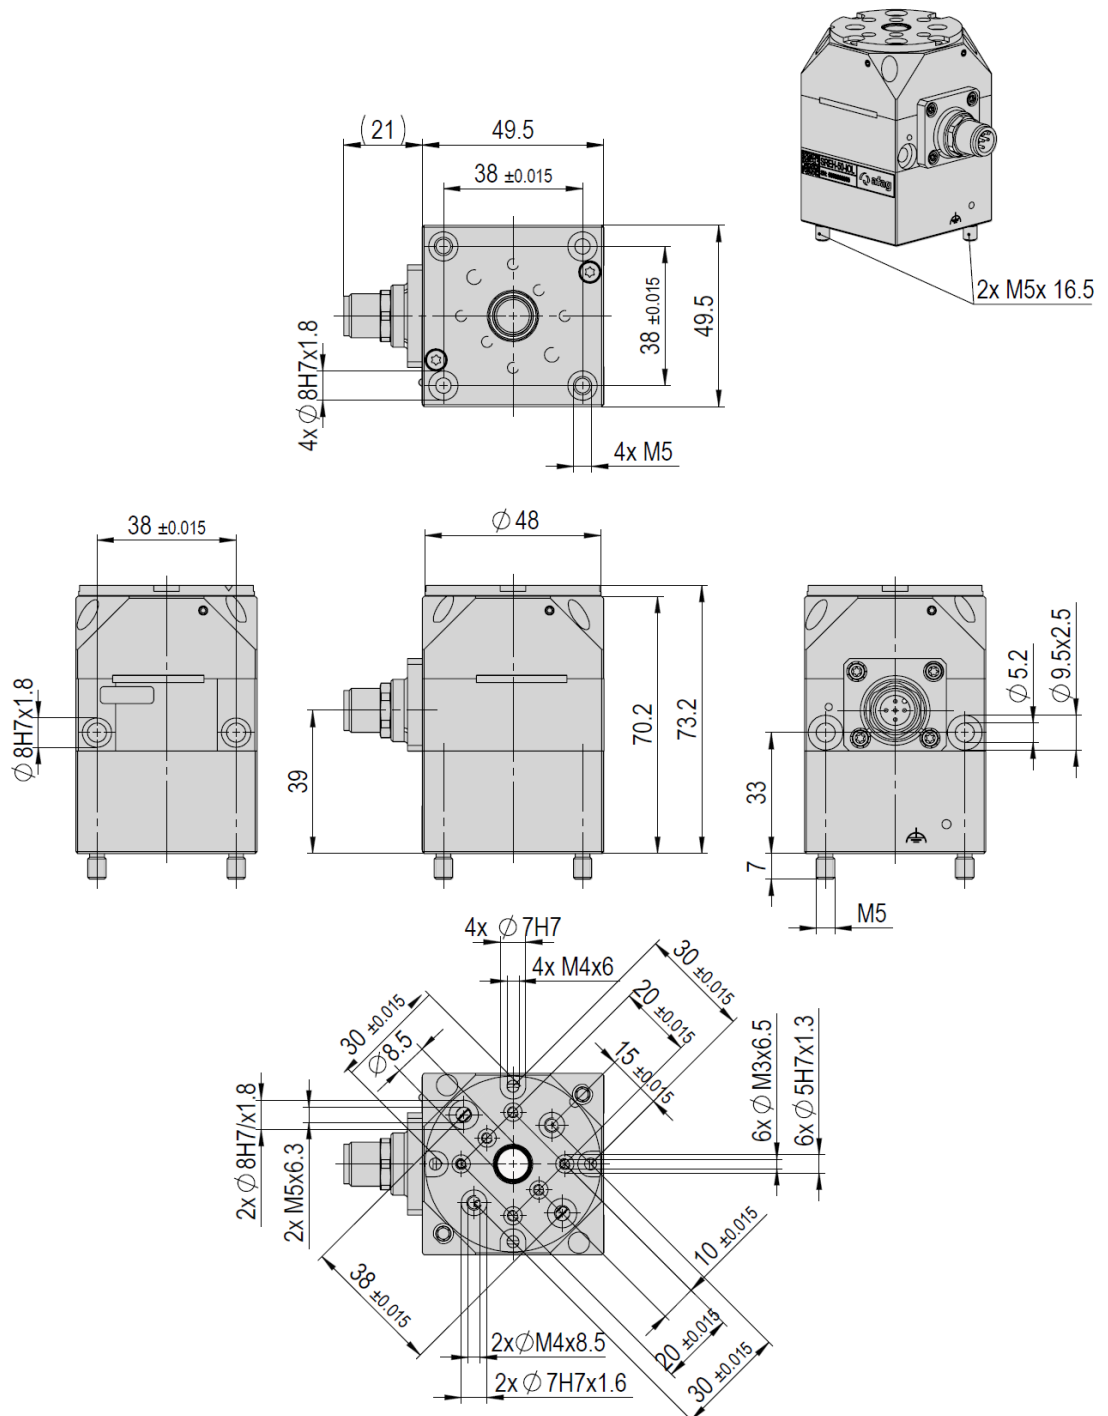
Dimensional drawing smart rotary module SREH-50-IOL
